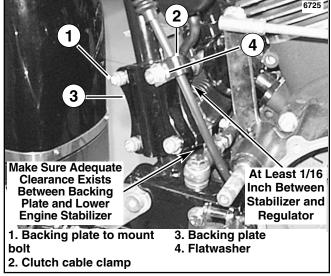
Install Backing Plate To Stabilizer (Left Side)
